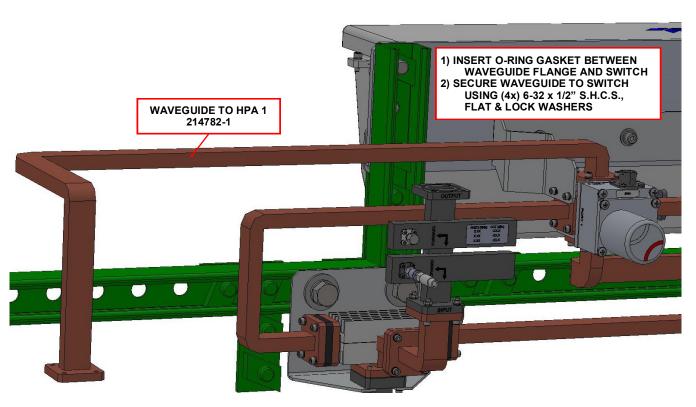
Attach W/G Segment 214782-1 to SW1
